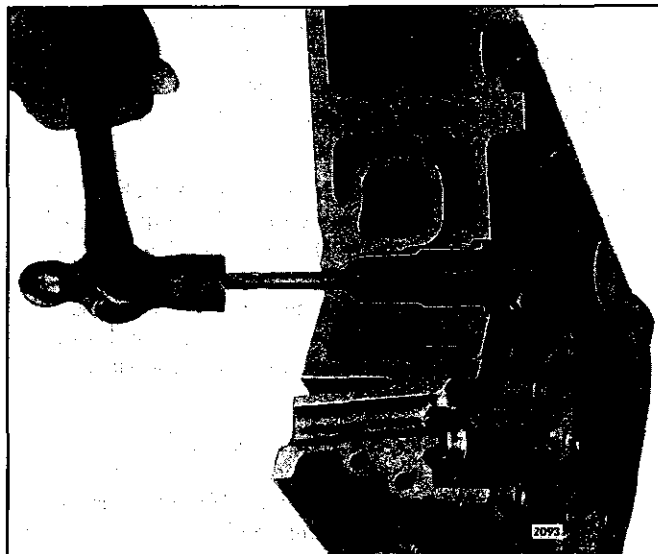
Removing Injector Tube Using Tools J 5286-4A and J 5286-5
